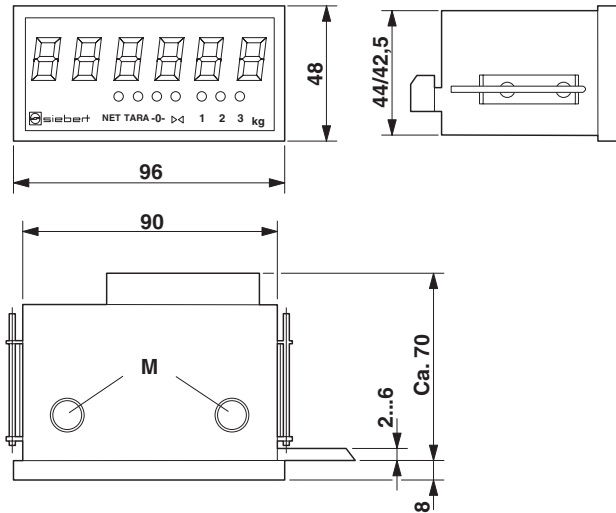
Dimensions of display S102 ... (dimensions in mm)
